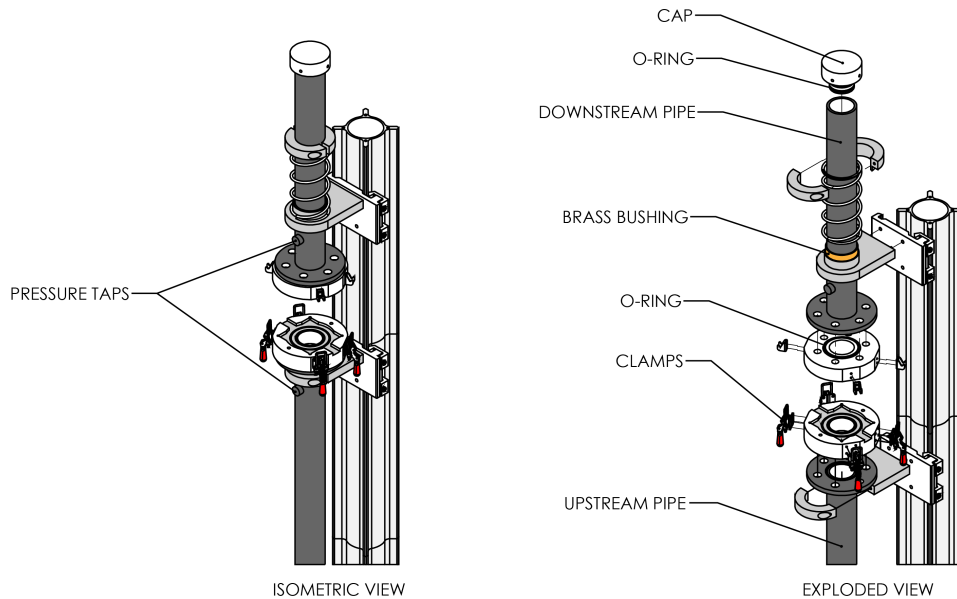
Assembly drawing and exploded view of the experimental setup, indicating how the test section holders are mounted to the pipes, along with the location of the clamps, pressure taps, and the cap that is used for leakage tests
